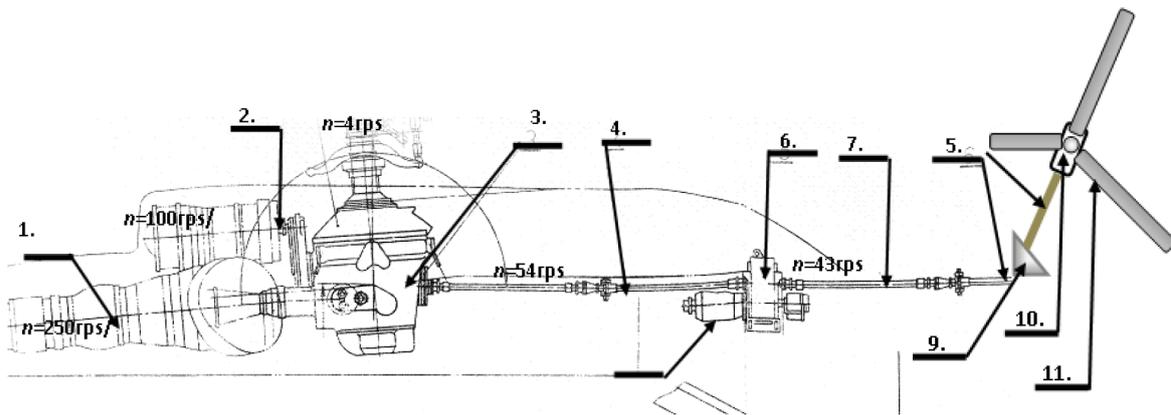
The location of transmission elements between engine and generator on the multi-purpose helicopter: 1 – powerplant, 2 – mechanical fan, 3 – main gearbox, 4, 5, 7 – power transmission shaft, 6 – generator power gearbox, 8 – left generator (behind it, to the same power and accessory gearbox a right generator is mounted), 9 – intermediate tail rotor gearbox, 10 – tail rotor gearbox, 11 – tail rotor
